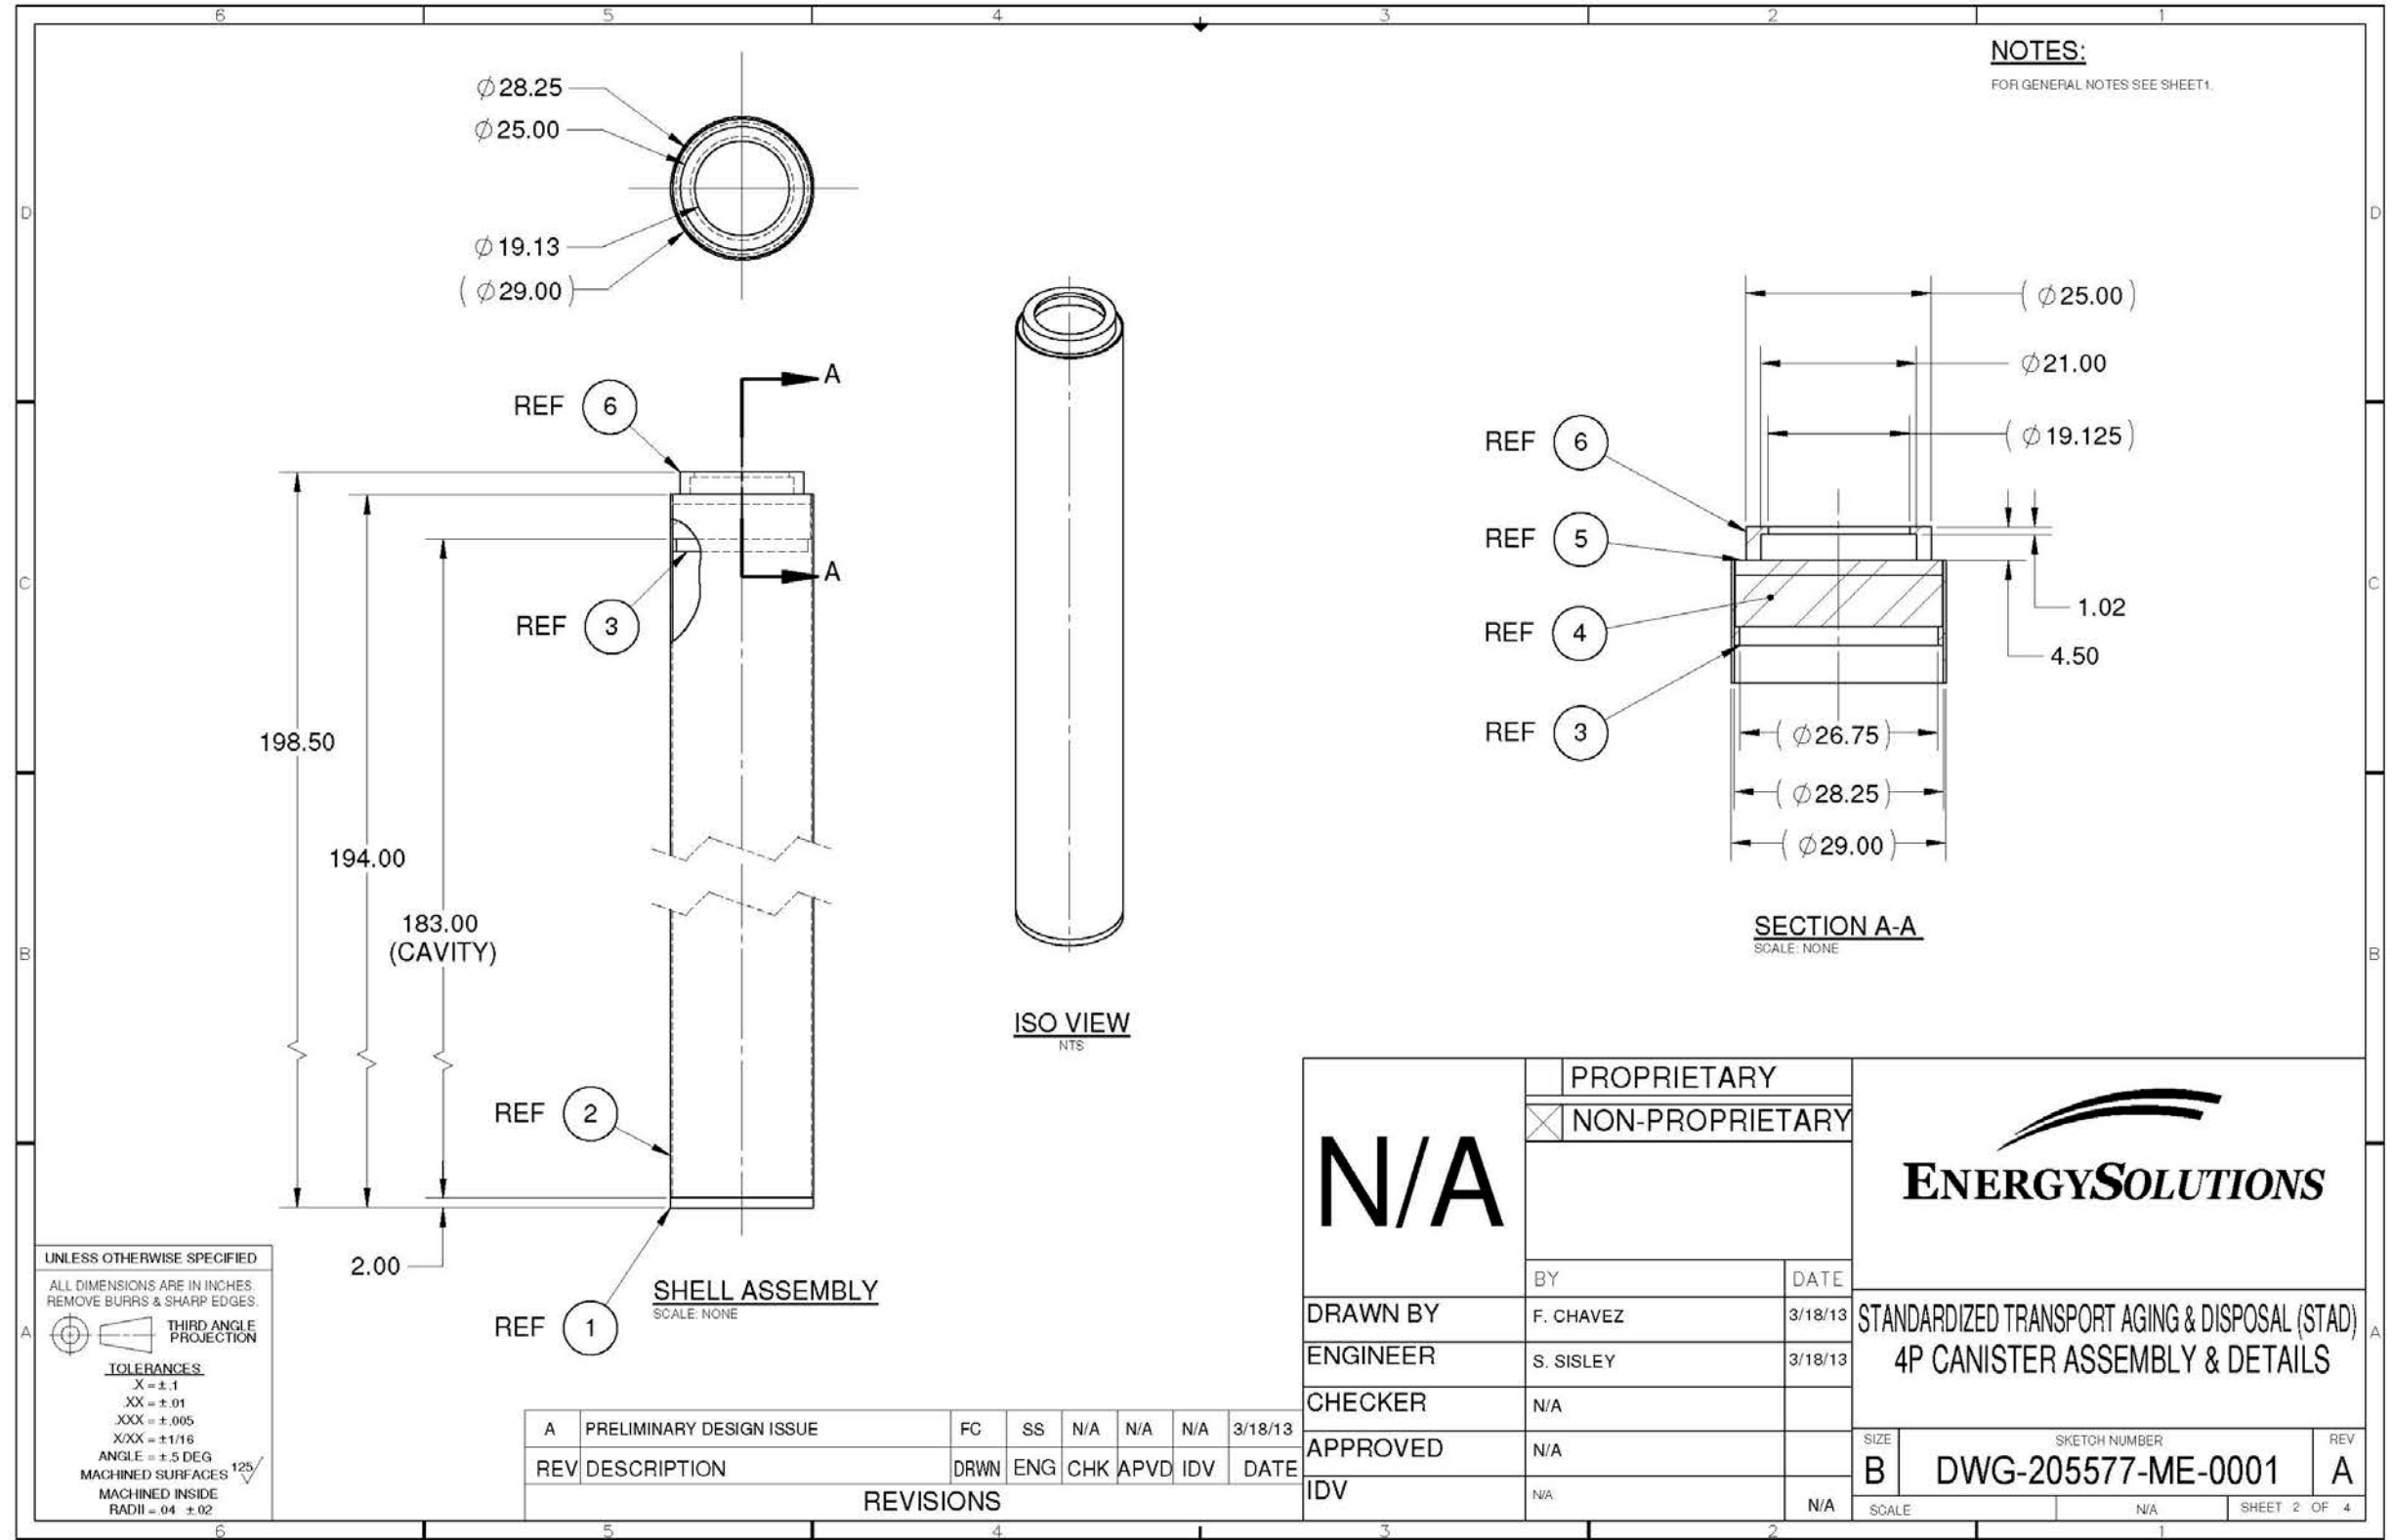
Standardized Transport, Aging and Disposal Canister - 4 PWR Assemblies - Assembly & Details – Sheet 3 of 4
